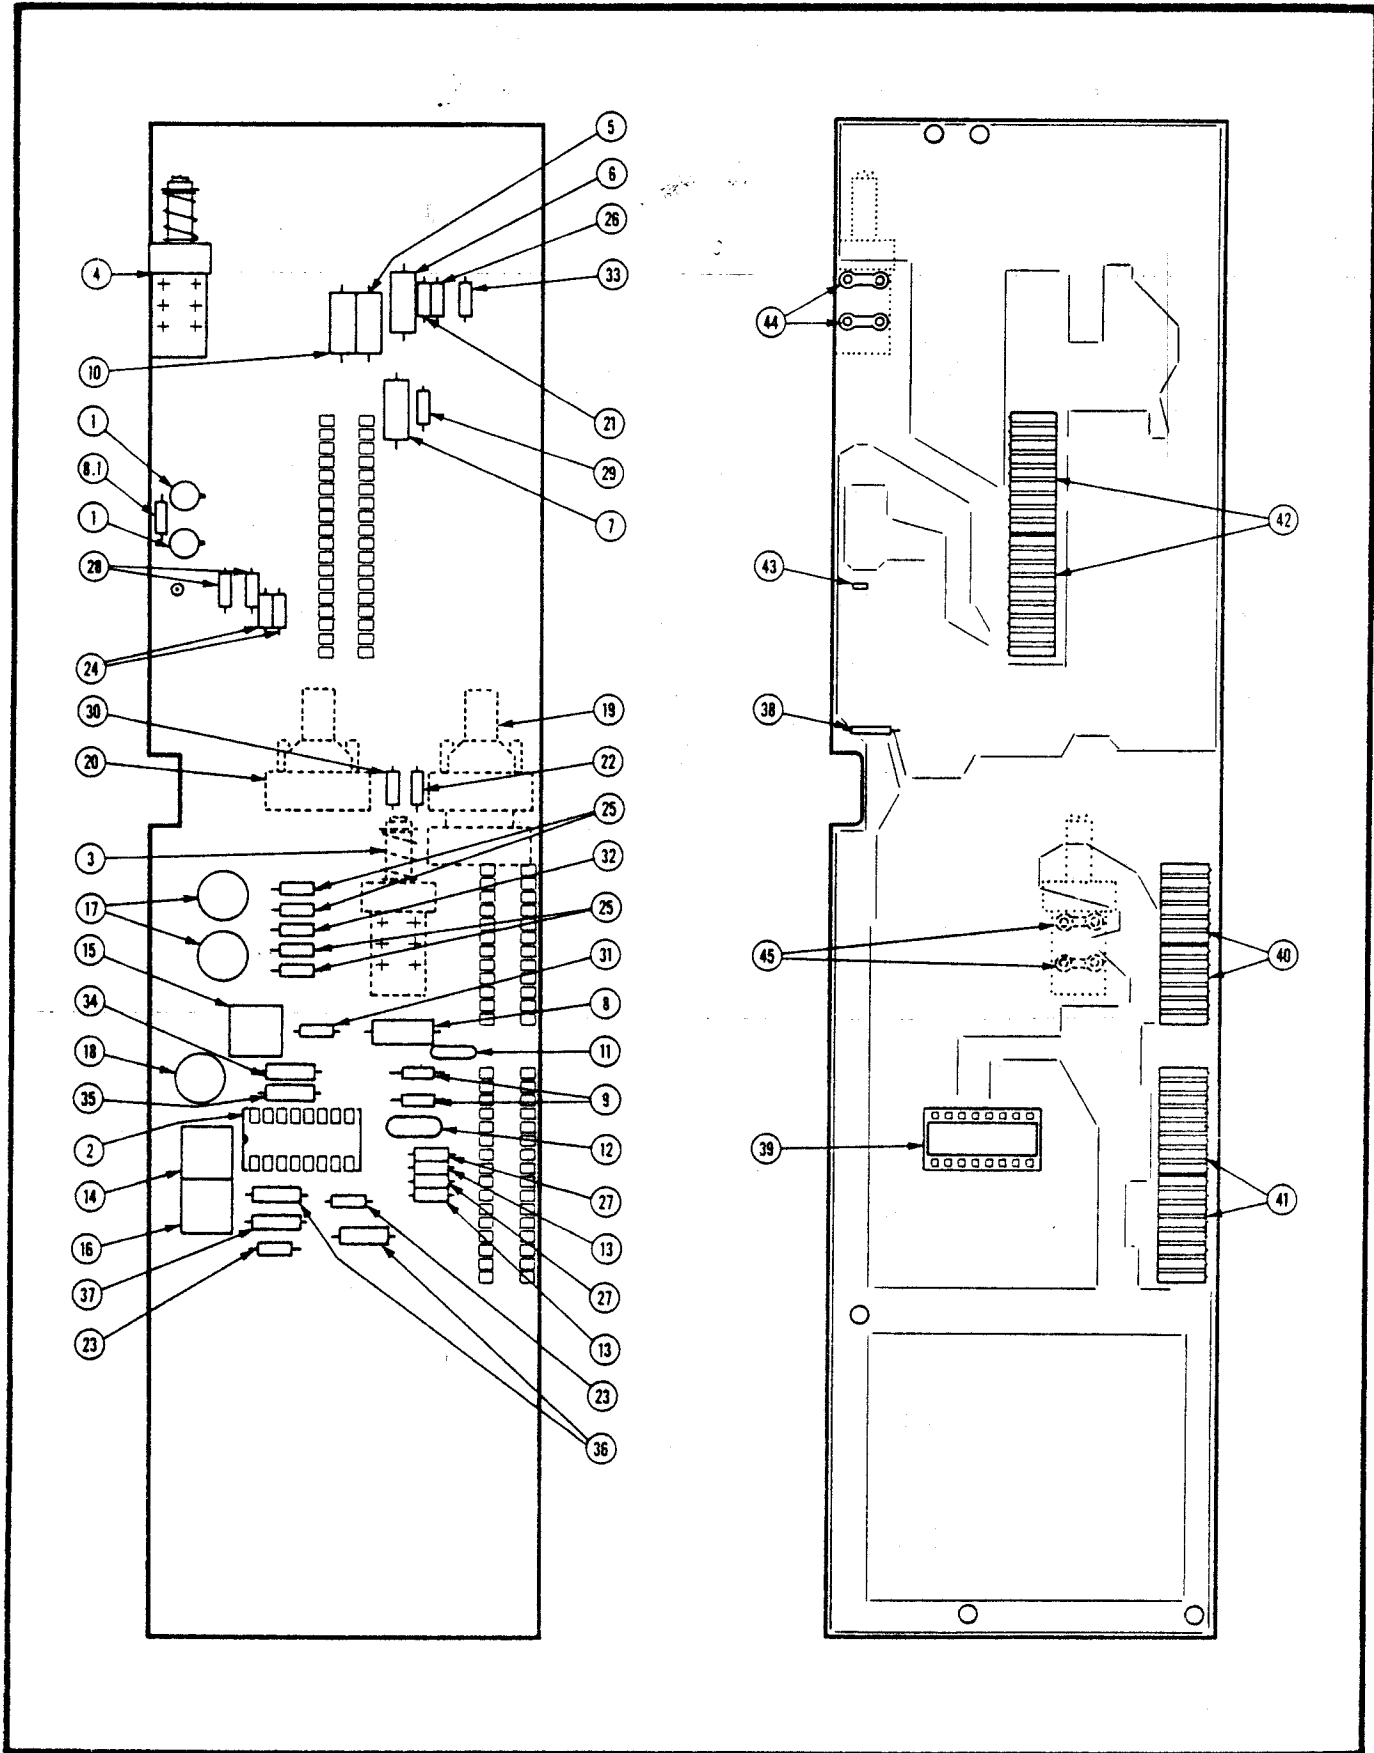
A6 Circuit Board Assembly, Horizontal.
